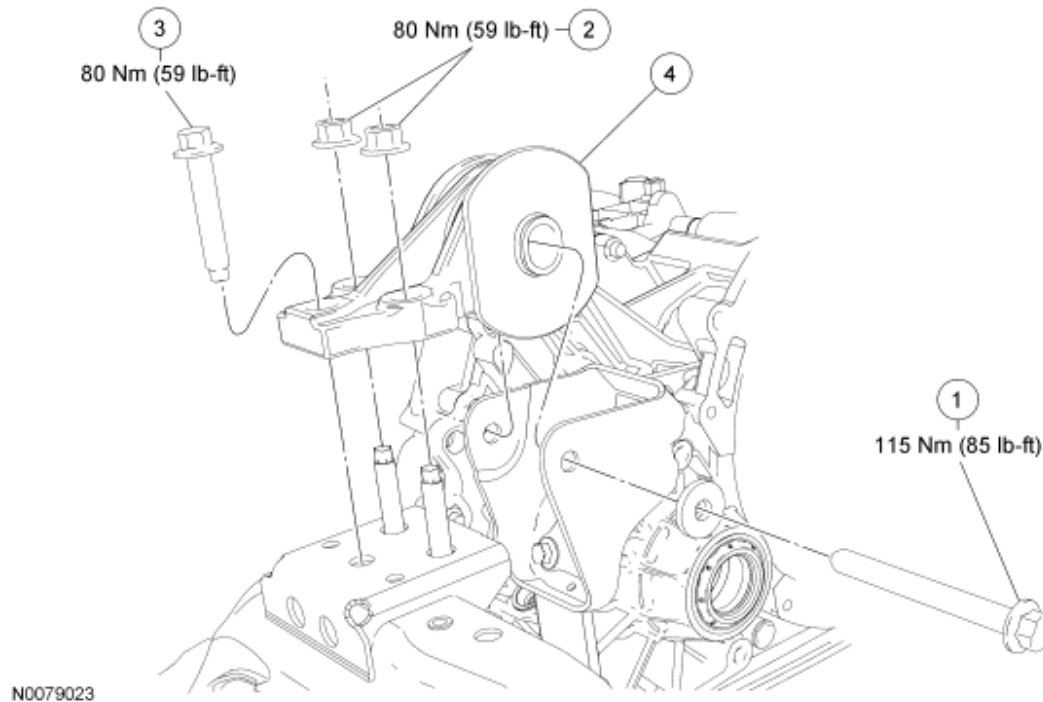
Transaxle Support Insulator Components - Lower, Rear, 2.3L With Torque Specifications
